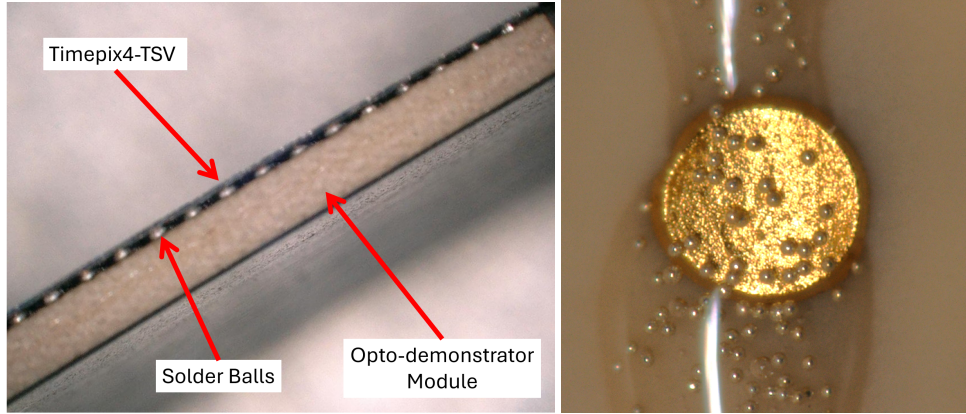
Two methods of bonding an ASIC to PCB: balling the ASIC and soldering (left) or bonding with ACP glue (right) using 30 μm metal particles deposited on the opto-demonstrator module (section 4).
